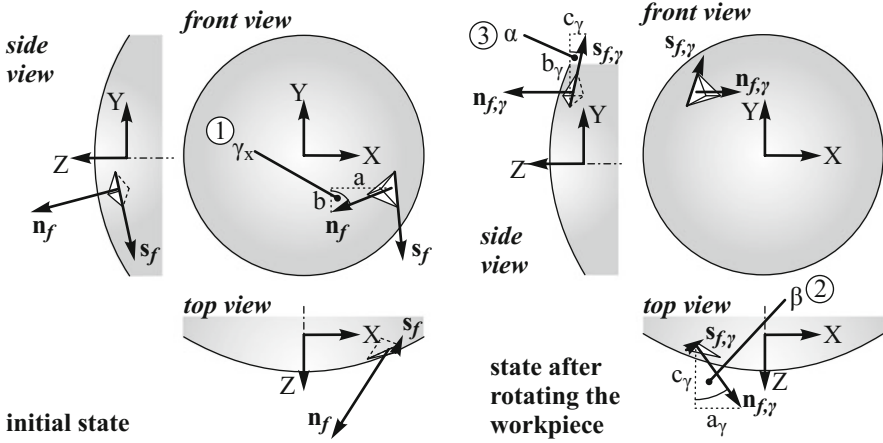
Alignment of tool and structure for DMC on curved surfaces
